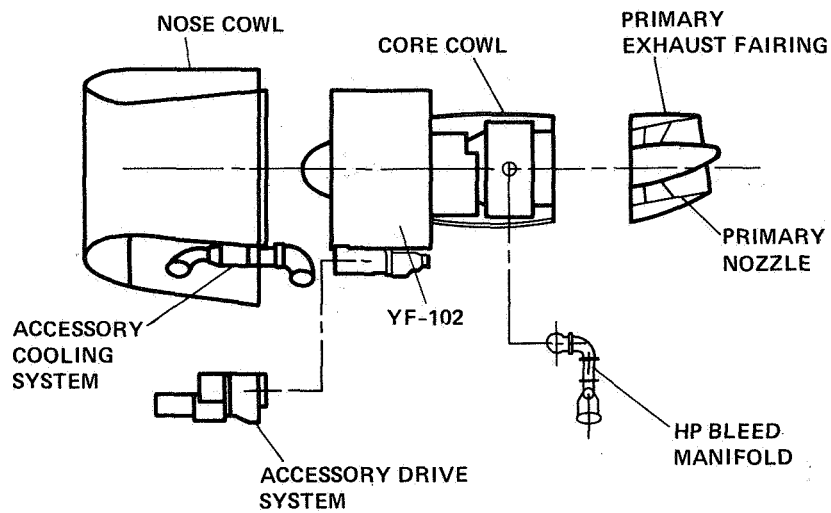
The engine build up showing the YF-102 (QSRA) engine installed in an assembly consisting of the engine, core cowl, inlet, and primary nozzle.
